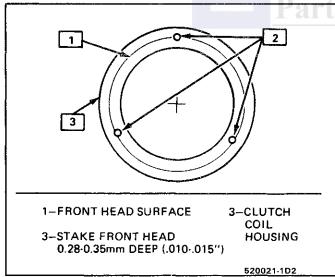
Details of Stakes In Front Head for Clutch Coil
